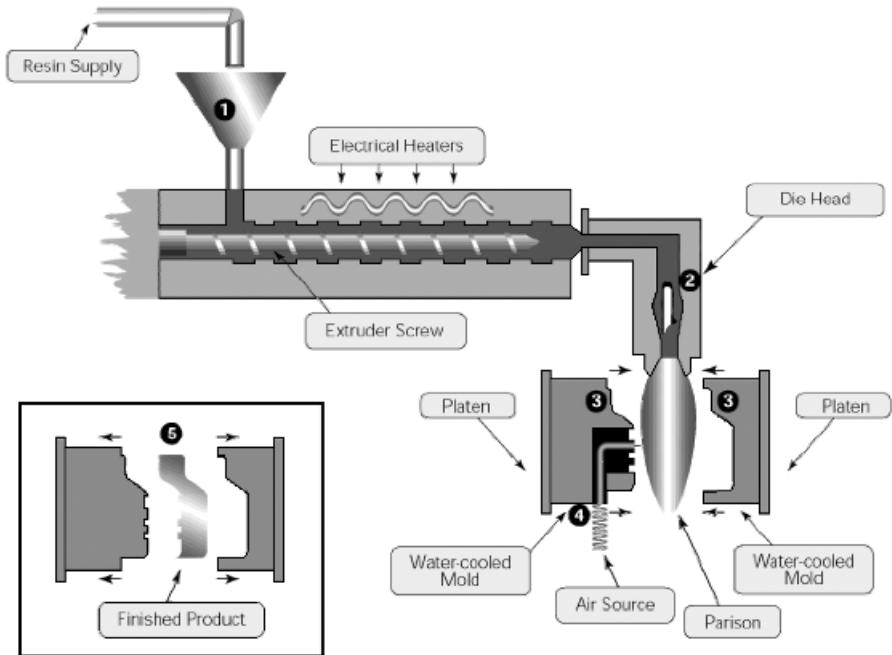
Components of the extrusion blow molding processes. 1, Feed hopper; 2, die head; 3, mold; 4, air source; 5, finished part. (Courtesy of Delta OEM Division, Raleigh, NC.)
